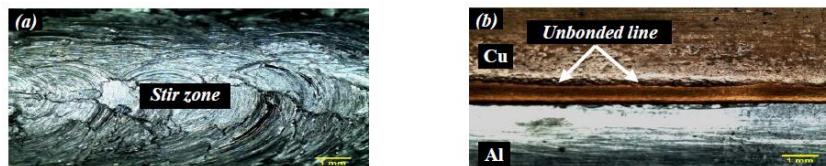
Optical macrograph of dissimilar aluminium and copper joint, FSW at a rotational speed of 1000; (a) Top view and (b) Bottom view.
